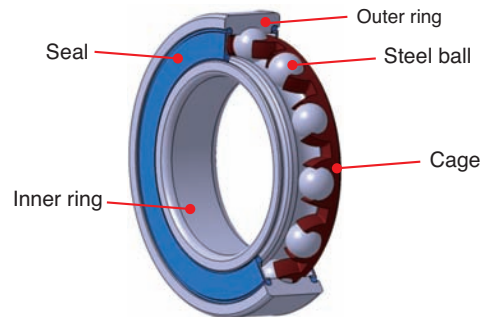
Grease lubricated high-speed deep groove ball bearing for EV/HEV motor
